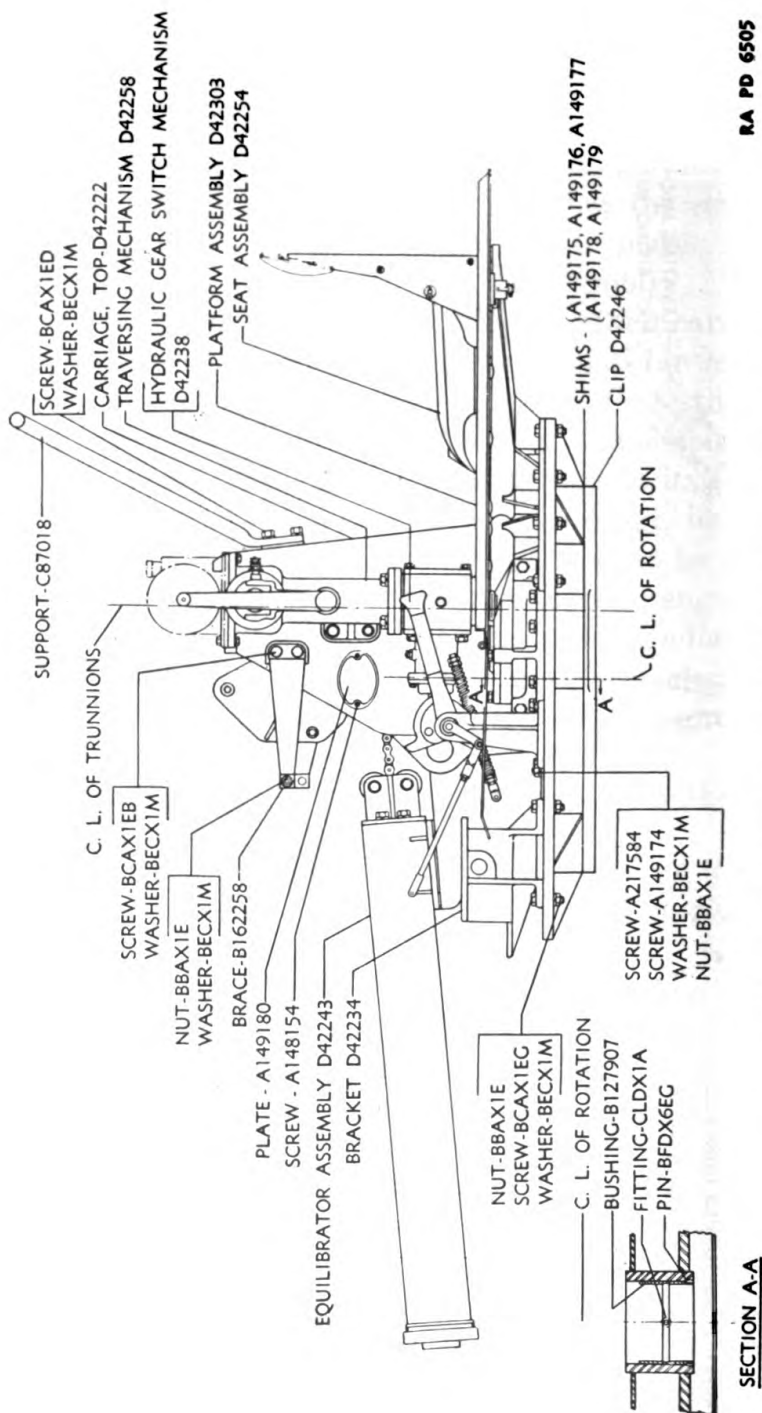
Top carriage assembly, M3A1 carriage—left side view.
